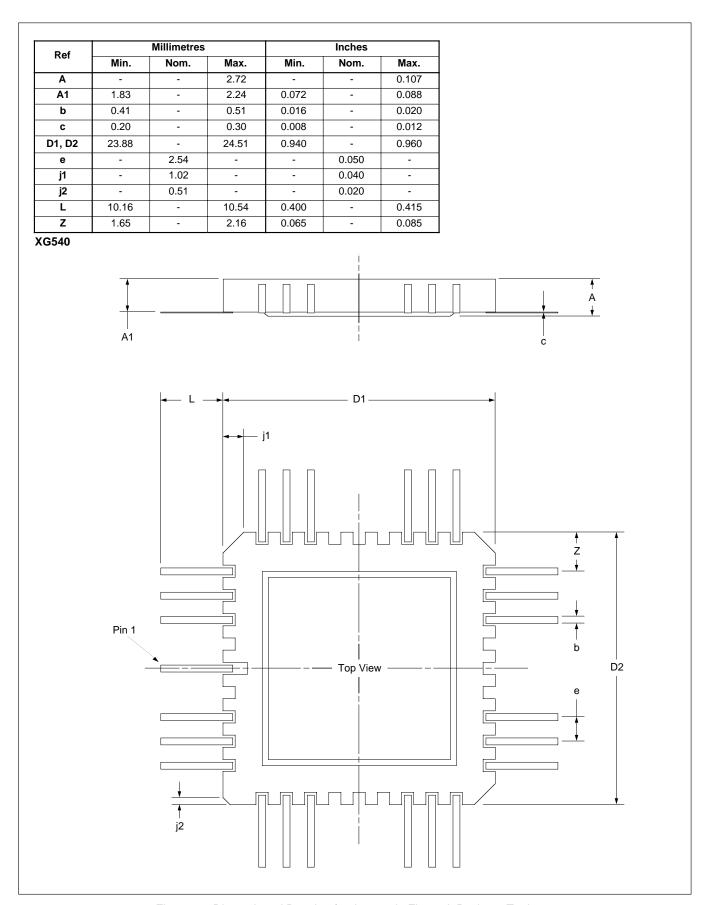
Dimensioned Drawing for the 68-pin Flatpack Package Topbraze
